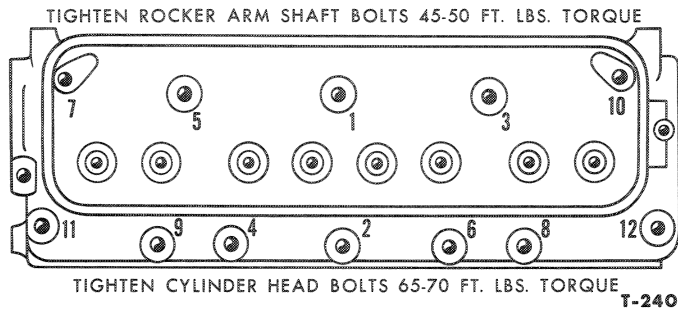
Cylinder Head Tightening Sequence (Gasoline Engines)
